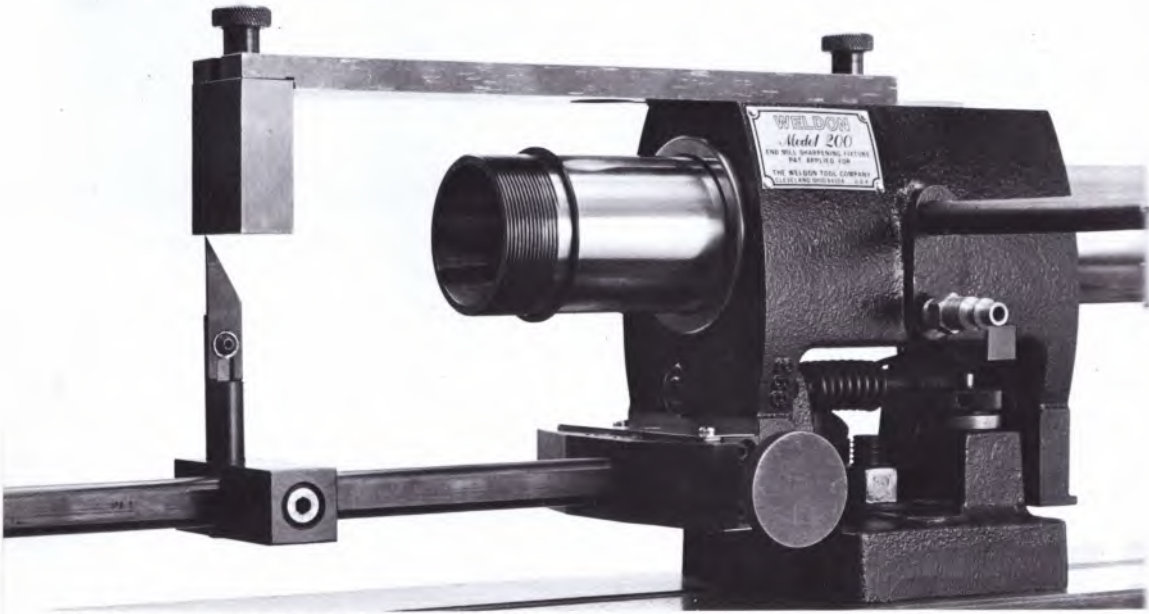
Tip of Finger on Spindle Horizontal Centerline
